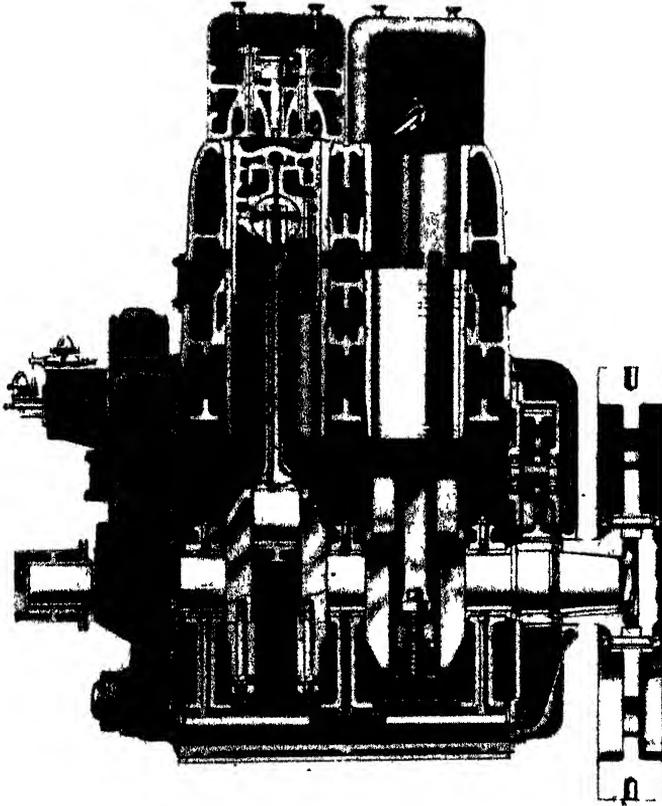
Petter Super-scavenge Oil-Engine. Sectional illustration
